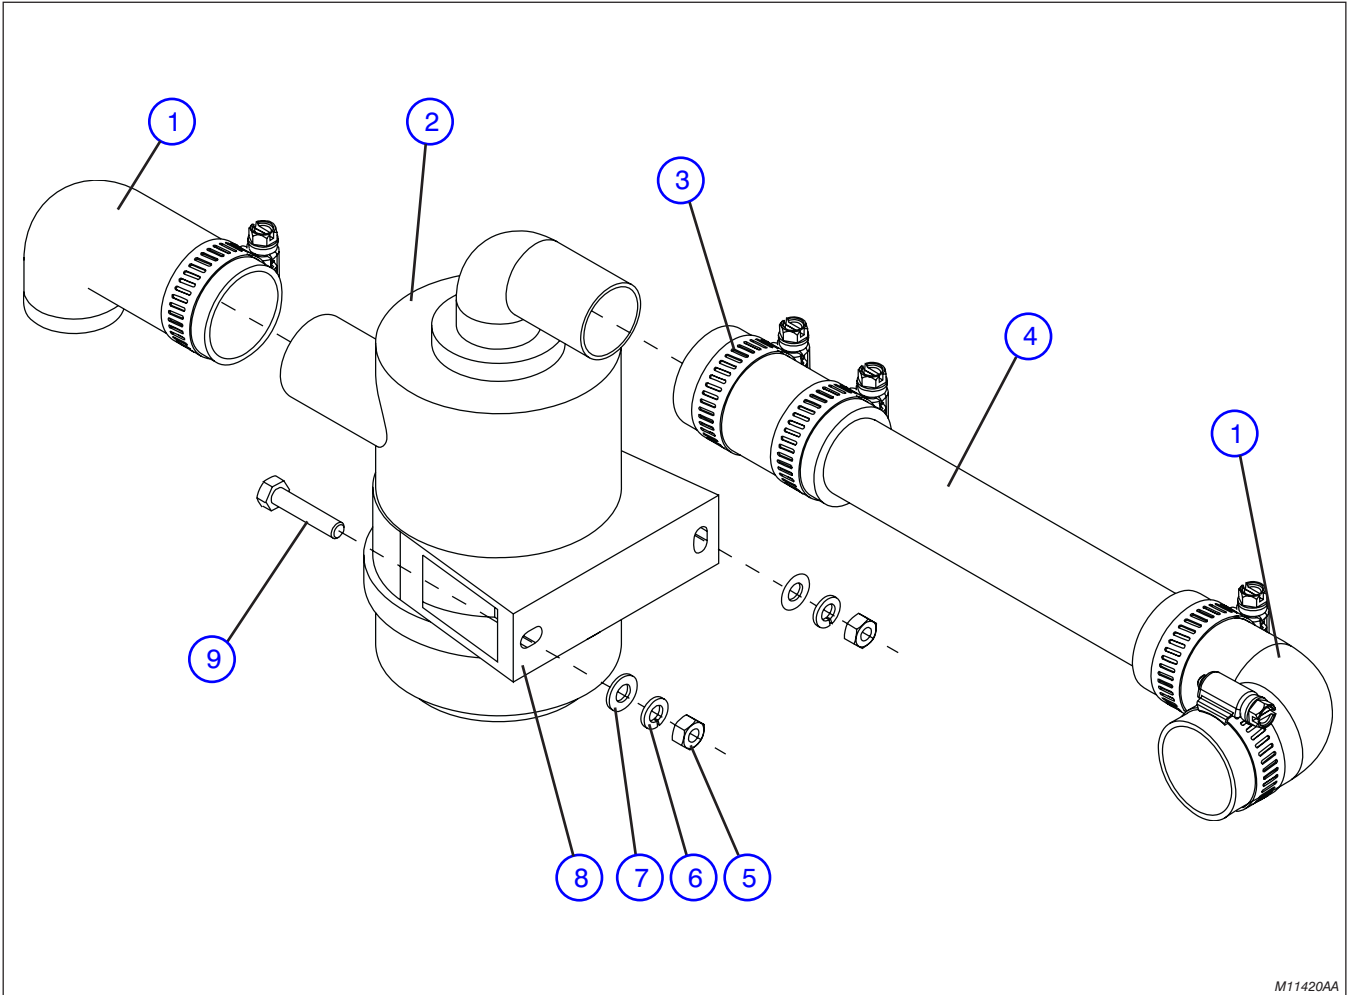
Diesel Engine Assembly (Kubota Engine D1105) (Continued)
